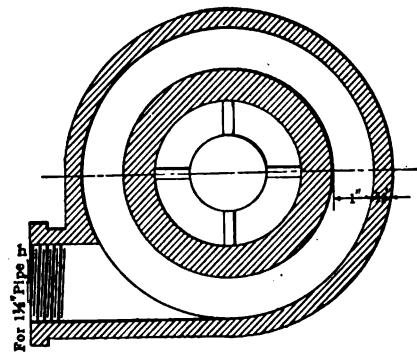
e*. — CROSS-SECTION ON *C D*.
